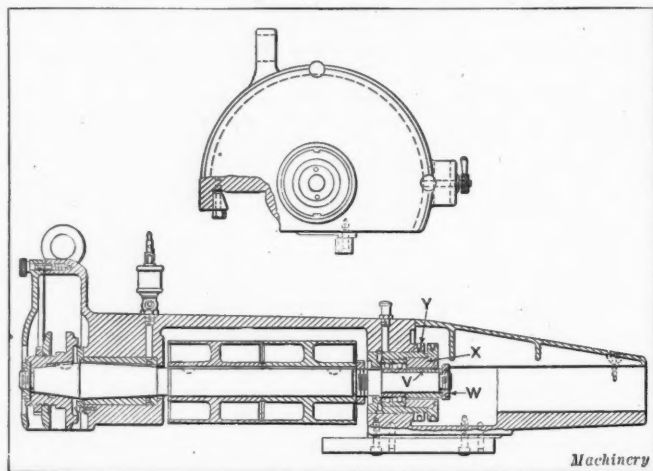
Sectional View through Wheel-slide, showing Improved Type of Spindle Bearing Construction
